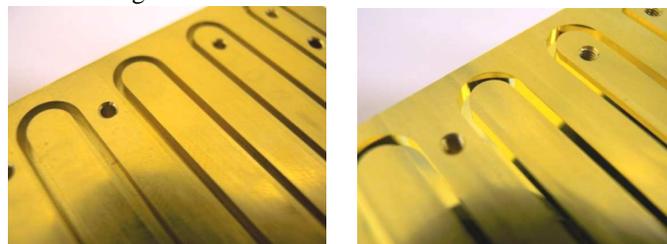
Left: WR10 waveguide machined with carbide tool. Right: WR10 waveguide machined with diamond tool showing the specular effect at the waveguide bottom.
